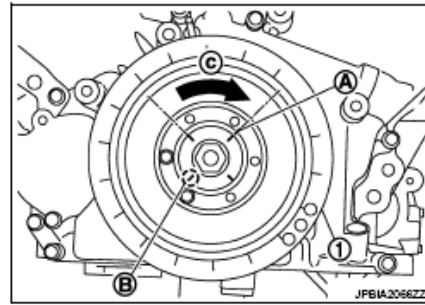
Identifying Crankshaft Pulley Mounting Bolt
